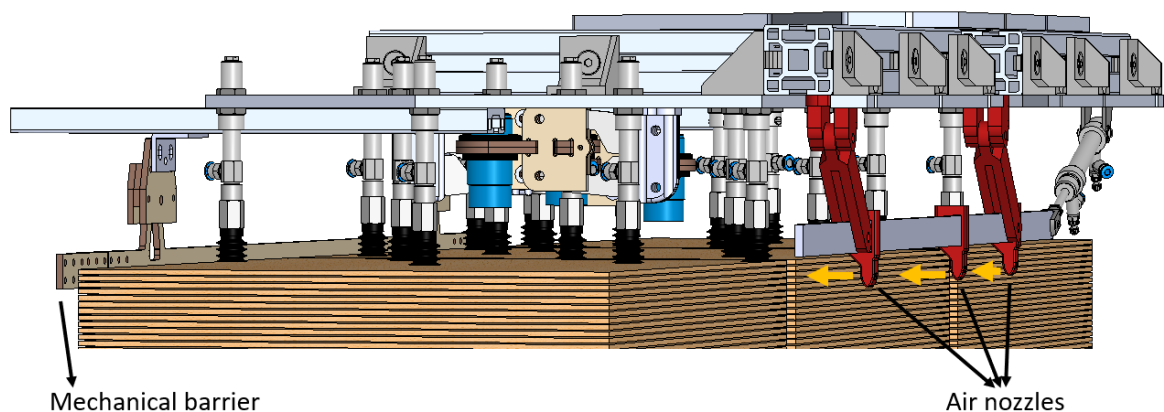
Section view of the gripper for horizontal air blowing process illustration
